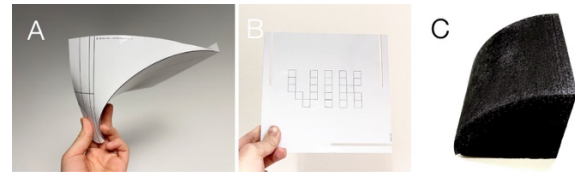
A) A curved-crease folded flex PCB molding insert. B) One side of the rigid PCB molding base. C) A resultant soft-foam curved block.
